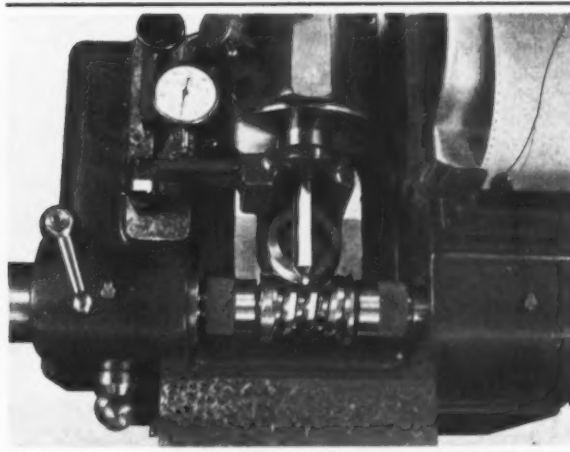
Arrangement for Setting Master Roller on Red Liner for Testing Hourglass Worm
